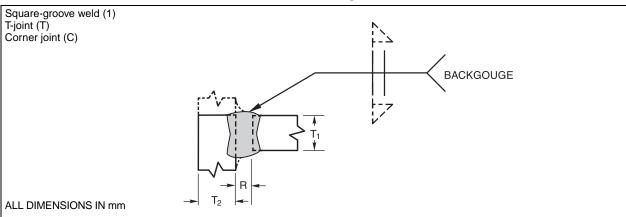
(Continued)—Prequalified CJP Groove Welded Joints—Nontubular (see 3.24.1)
